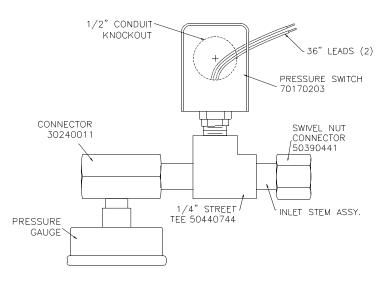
B - Pressure Gauge Assembly with Supervisory Pressure Switch (Top View) - S/N 20610262
